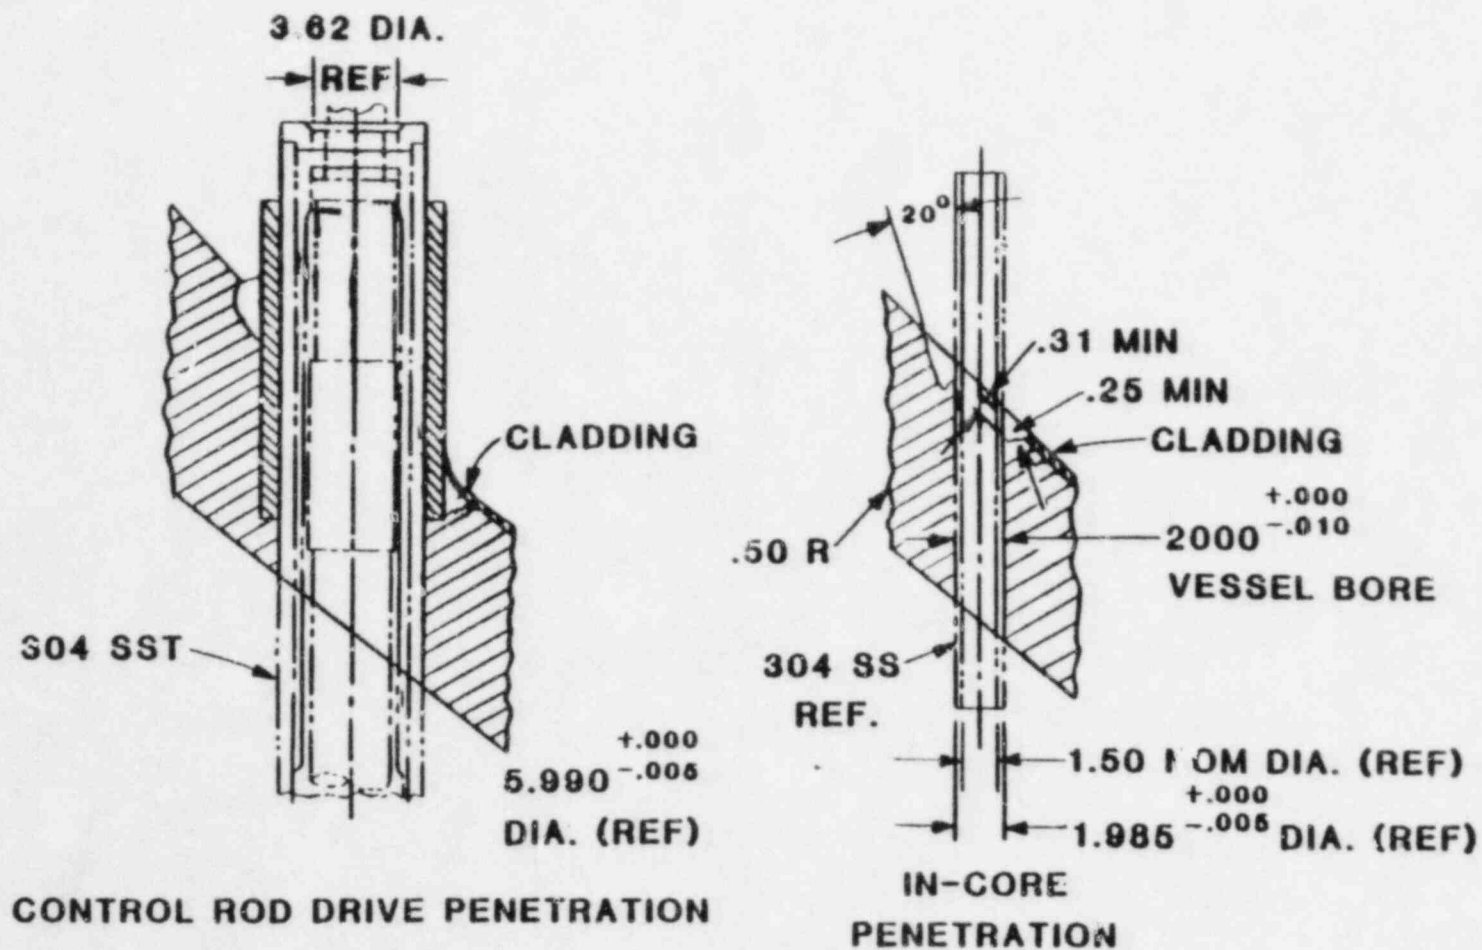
Typical penetration welds for BWR control rod drives and instrumentation.
